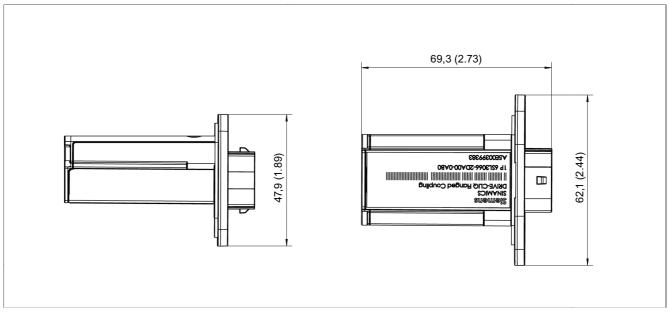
Dimension drawing of the DRIVE-CLiQ cabinet bushing, all dimensions in mm and (inches)
